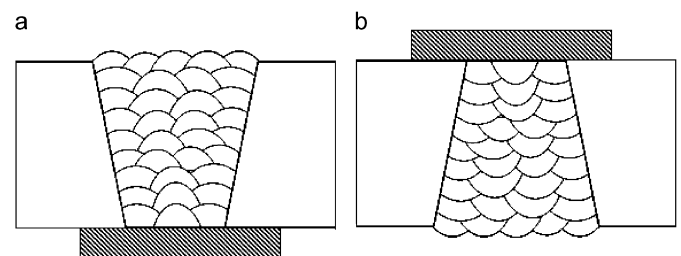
Schematic representation of (a) 1G weld and (b) 4G weld.
